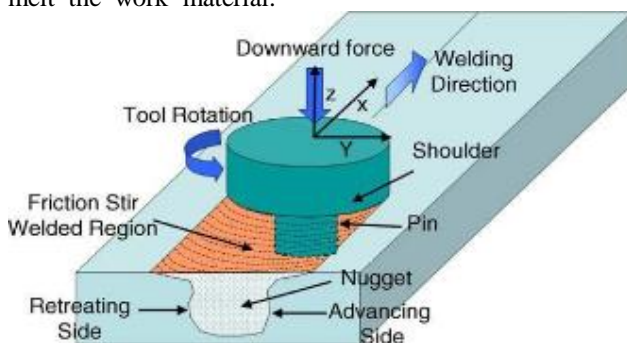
Schematic Drawing of FSW from [Mishra and Ma, 2005].
